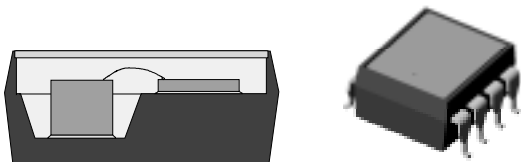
Pre-molded plastic DIL-type package is used for bulk micromachined accelerometers
